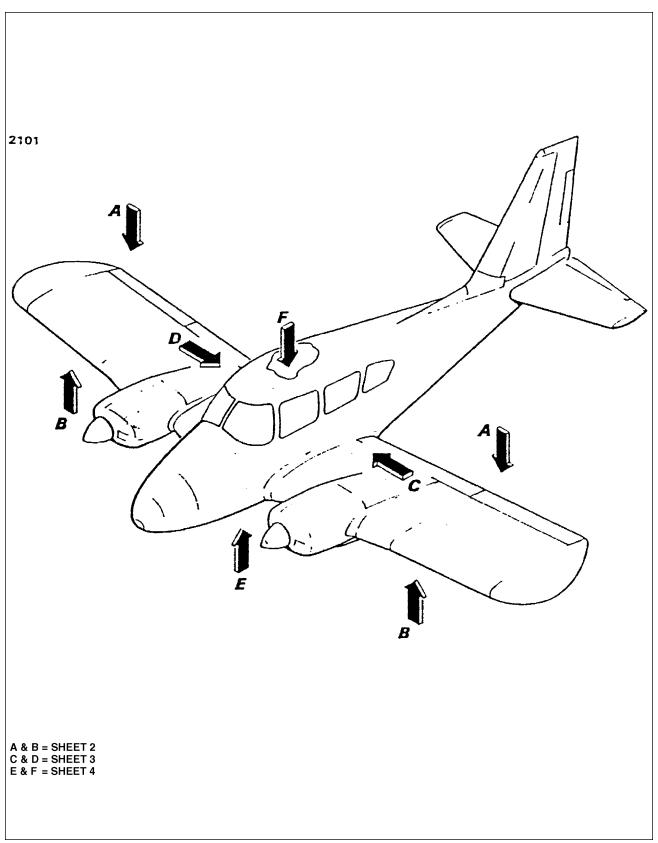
Access Plates and Panels PA-23-235 and PA-23-250 (Sheet 1 of 4)
